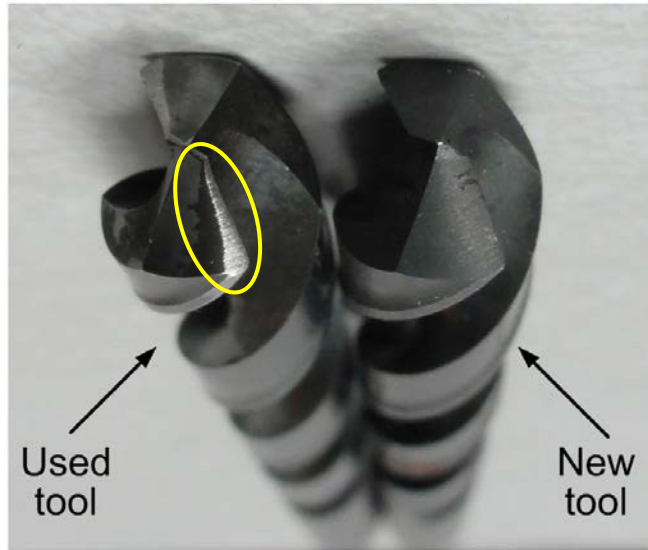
A new twist drill and a used twist drill after drilling five holes.
